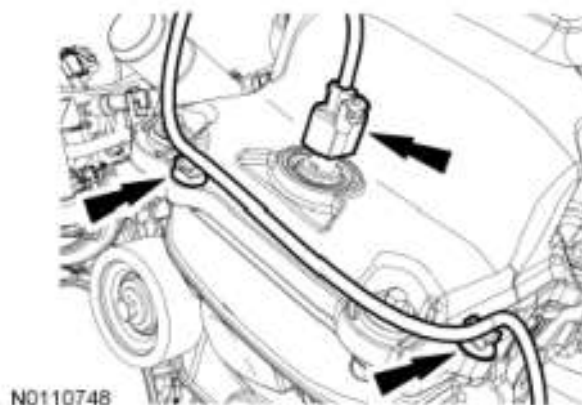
Locating LH Variable Camshaft Timing (VCT) System Oil Control Solenoid Electrical Connector And Wiring Harness Retainers
